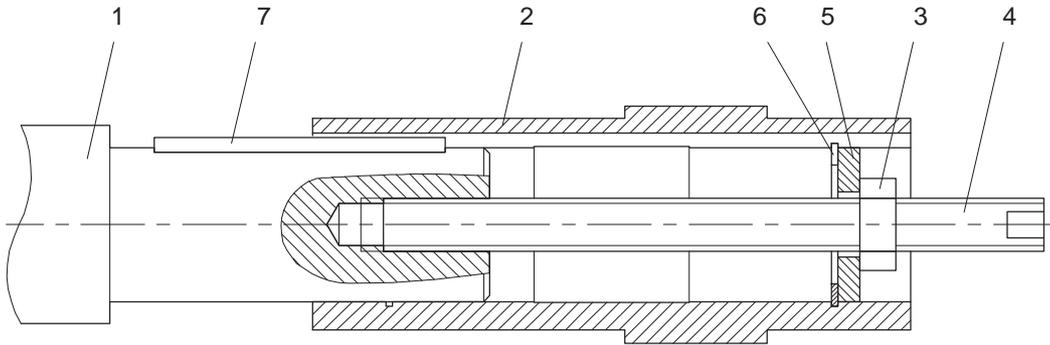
Mounting hollow shaft and parallel key
